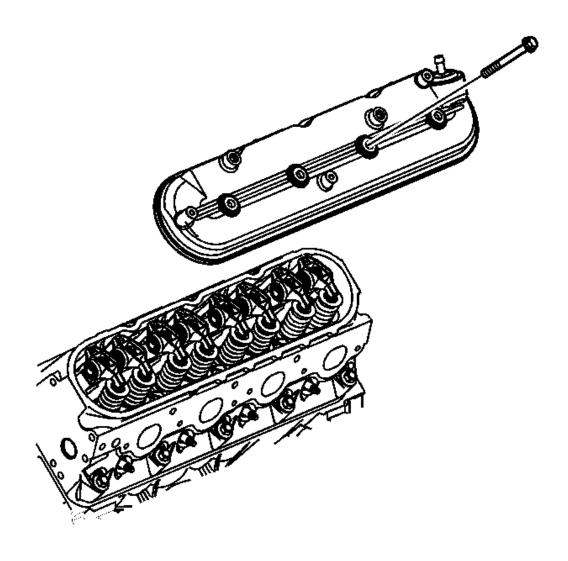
View Of Valve Rocker Arm Cover Courtesy of GENERAL MOTORS CORP.
